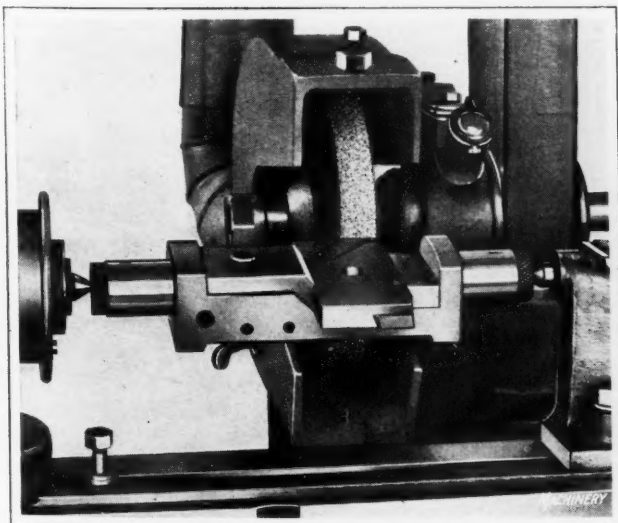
Grinding the Reamer Blades to the Specified Diameter and Lead Angle
